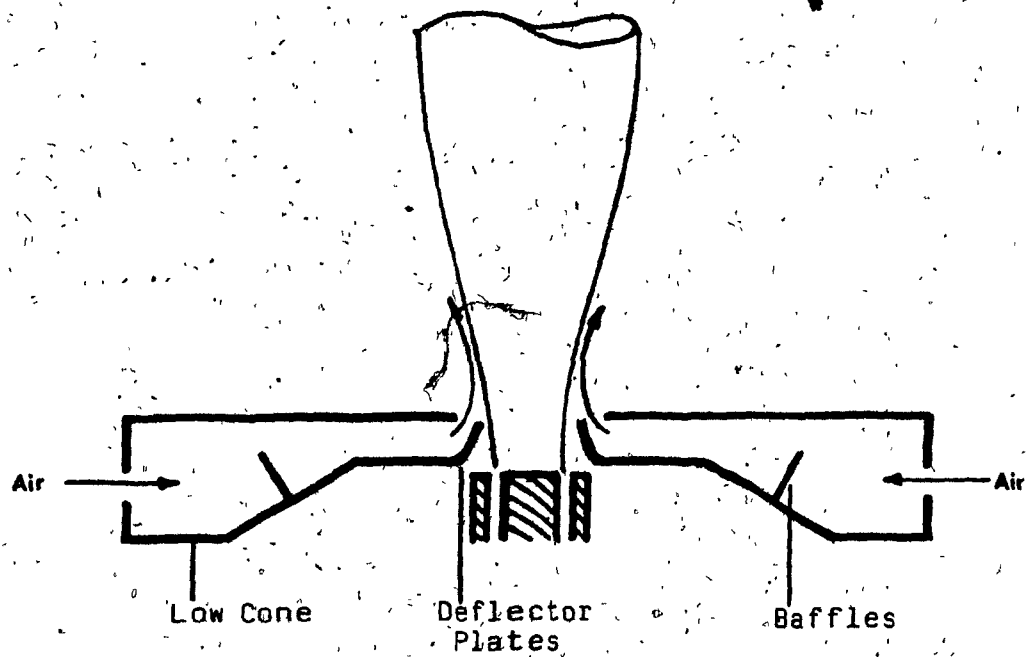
Cutaway View of a Modified Low Cone Air Ring
